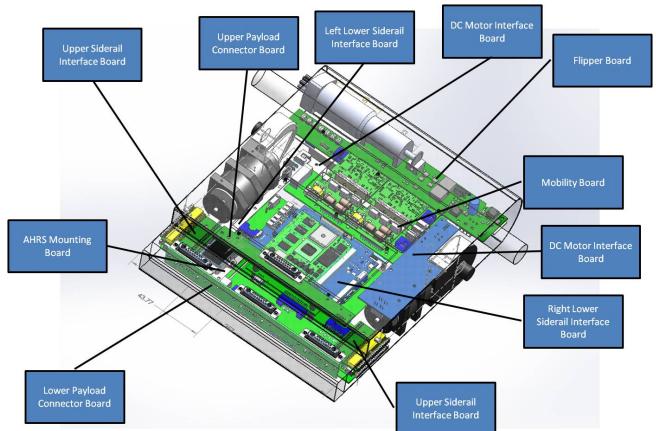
Front assembly interface board. This printed circuit board and sub-assemblies are part of the complete electrical component redesign of the Packbot.
